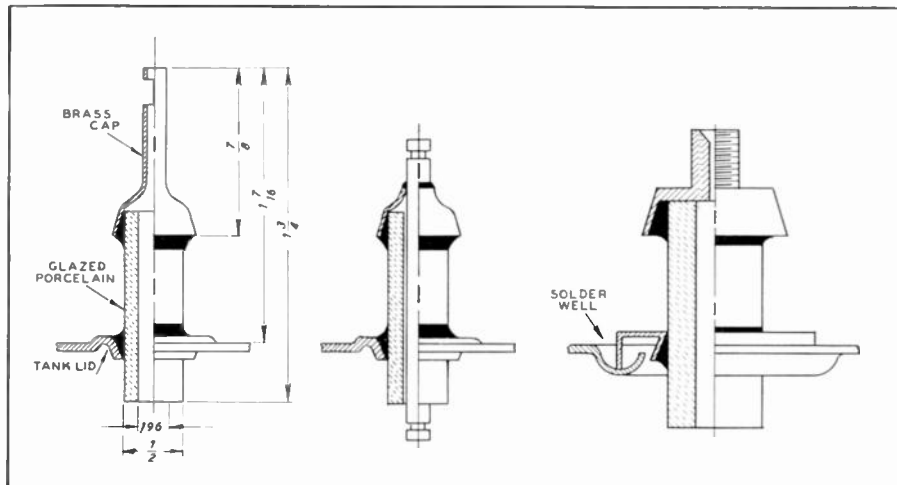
ACTUAL SIZE OF THREE TYPES OF CERAMIC BUSHINGS. ONE AT THE LEFT IS SOLDERED TO A MOUNTING RING, THEN SOLDERED TO THE CASE
